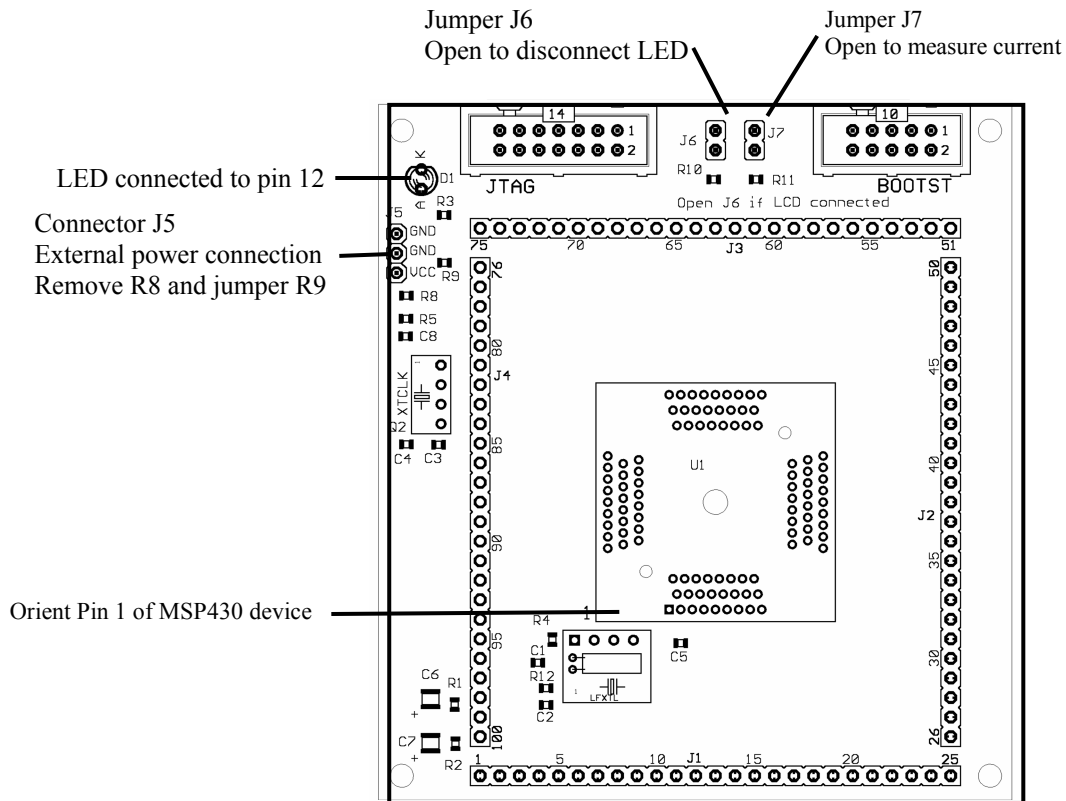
MSP-TS430PZ100 Target Socket module, PCB Pictorials
